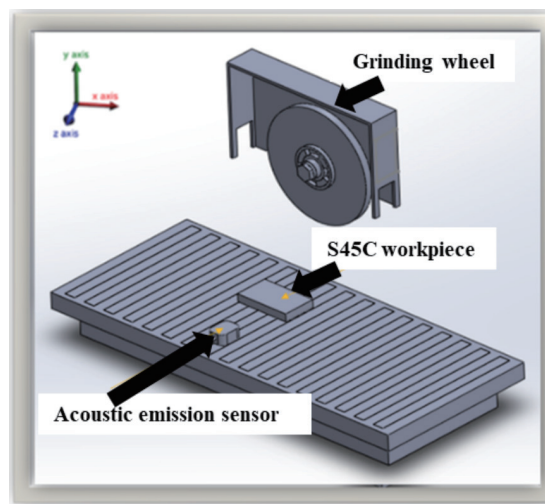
(Color online) Experimental setup showing the grinding wheel, S45C workpiece, and AE sensor installation.
